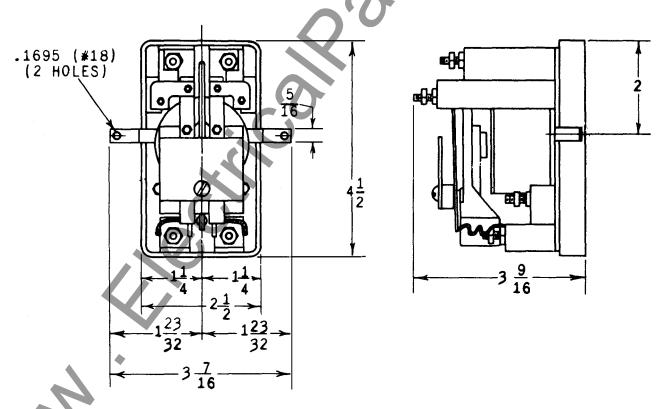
Outline Dimensions for Types HGHIIK Relays.
